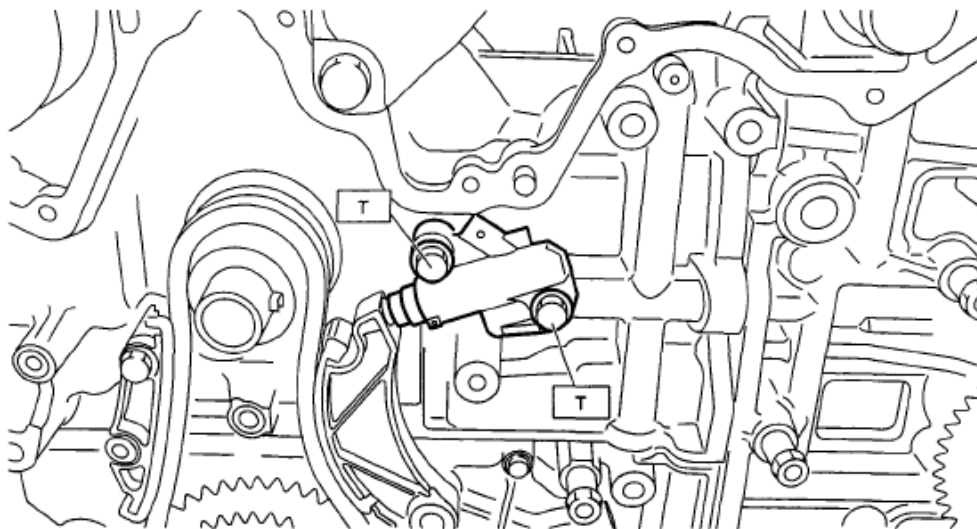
Identifying Chain Tensioner Lever (Main) Bolts Tightening Torque
